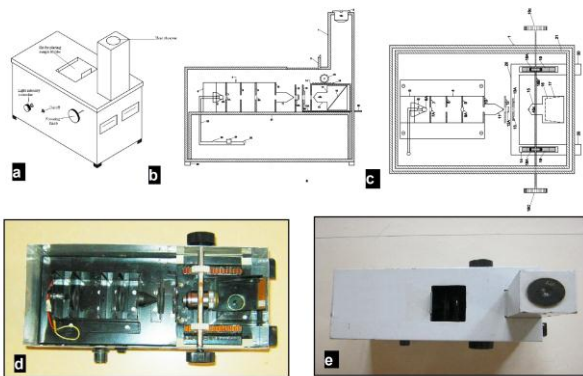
(a) Perspective drawing of device. (b) Side View drawing of device. (c) Top View drawing of device. (d&e) Actual construction of device.
